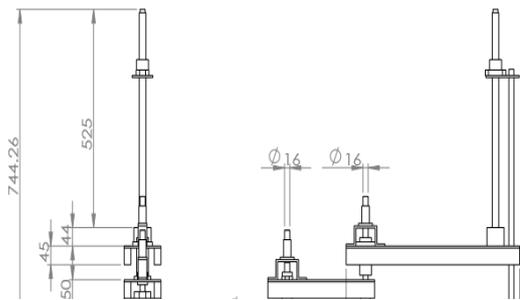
Overall dimensions of the manufactured SCARA robot
